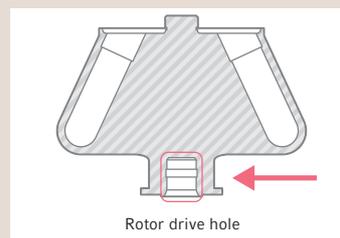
Drive hole in rotor (is placed on rotor shaft of centrifuge)
